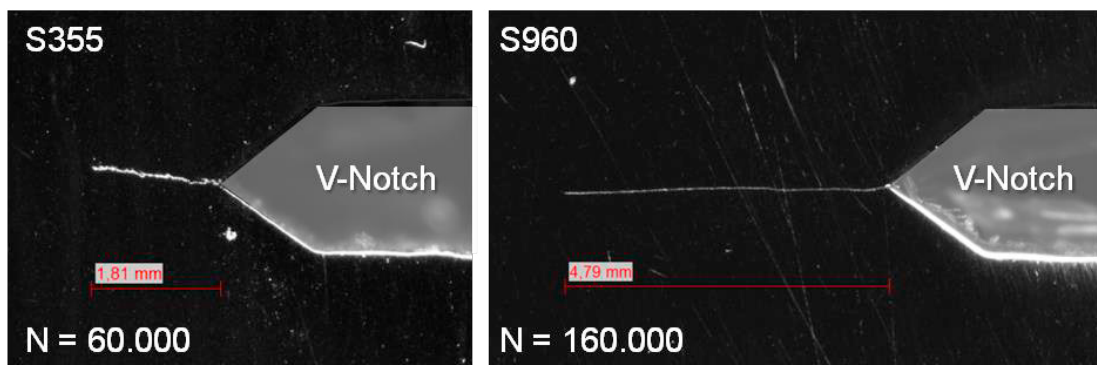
Optical crack length measurement for S355 and S960 specimen with crack initiation starting from V-notch
